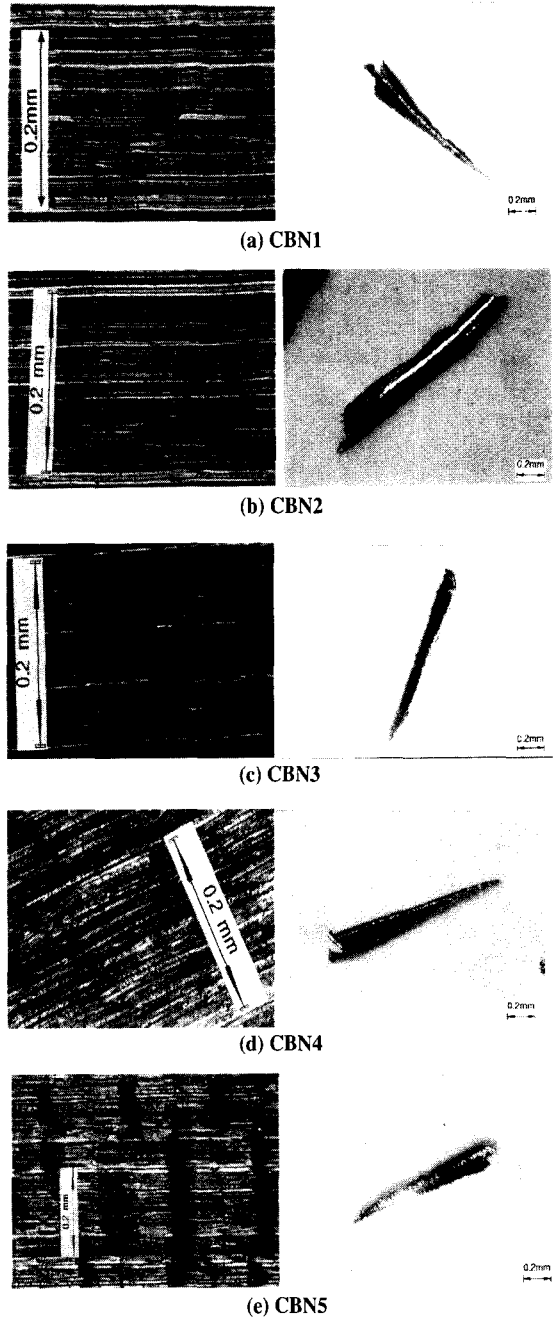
Machined surface and Chips for each cutting tools (after 34m of cutting)
